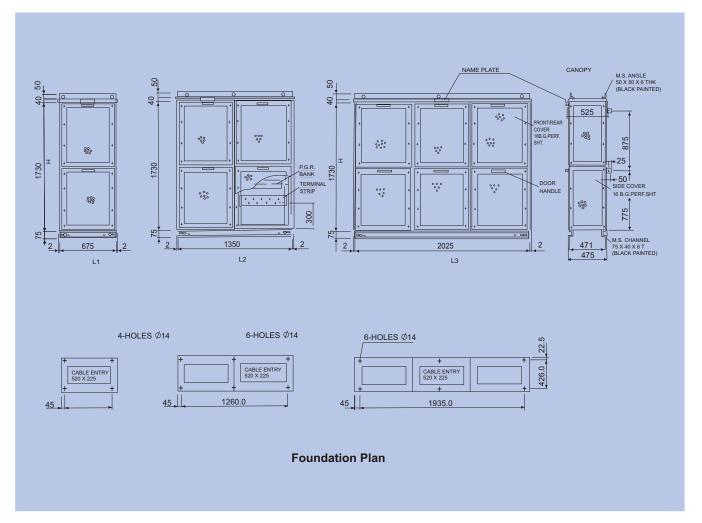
Overall dimensions wirh IP 11 (WL Type)
